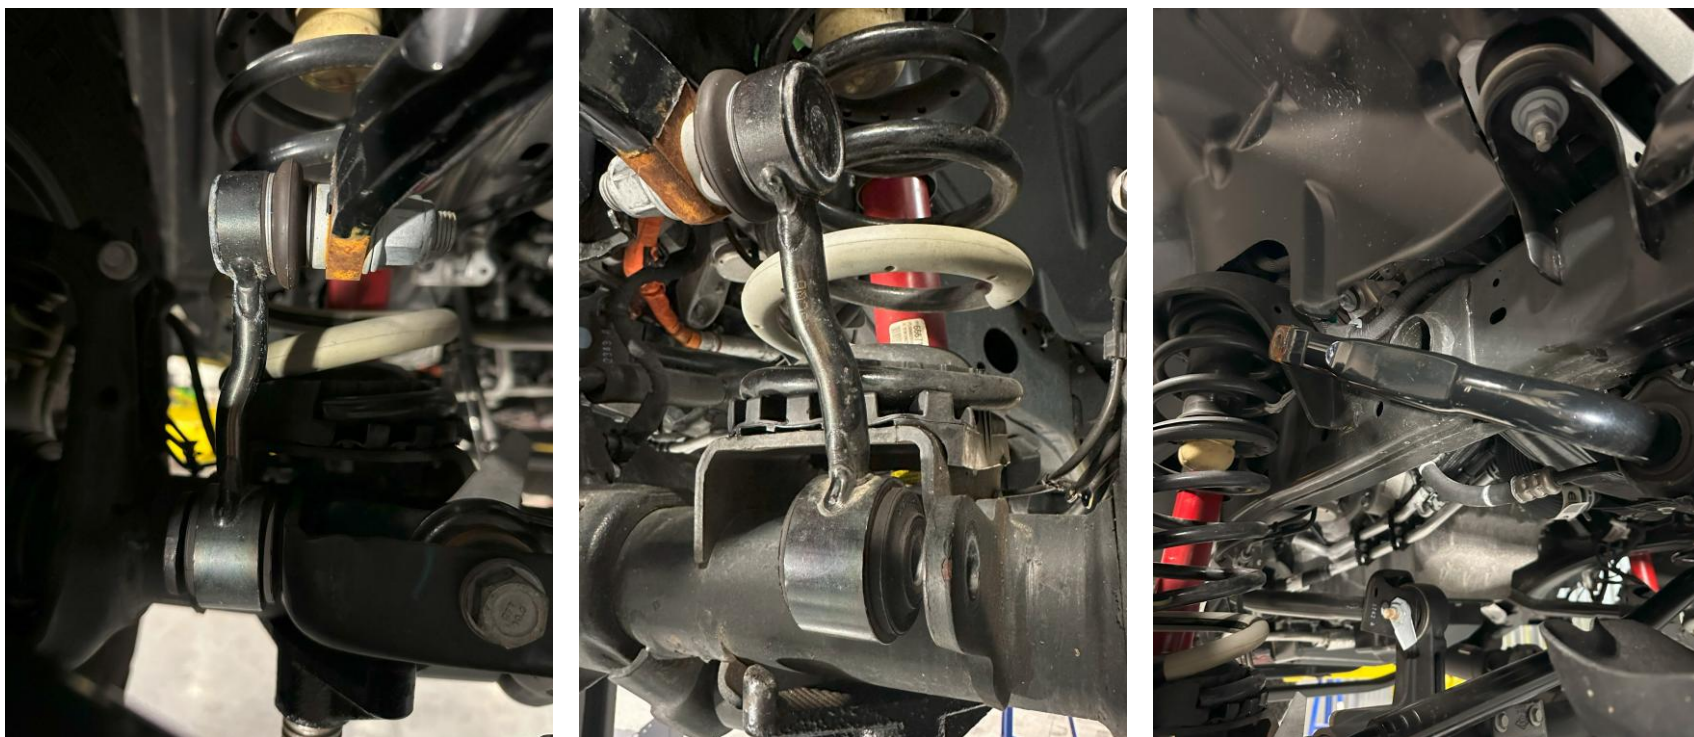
Front passenger and driver-side sway bar end link to be removed, with sway bar tucked up and away
